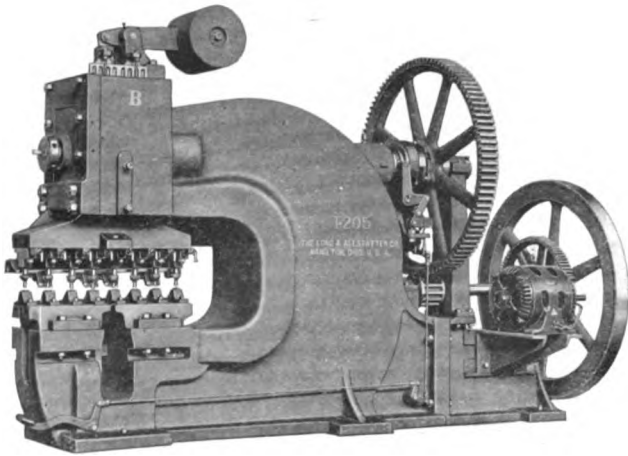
No. B I-Beam Punch and Coping Machine Equipped with Punching Tools
